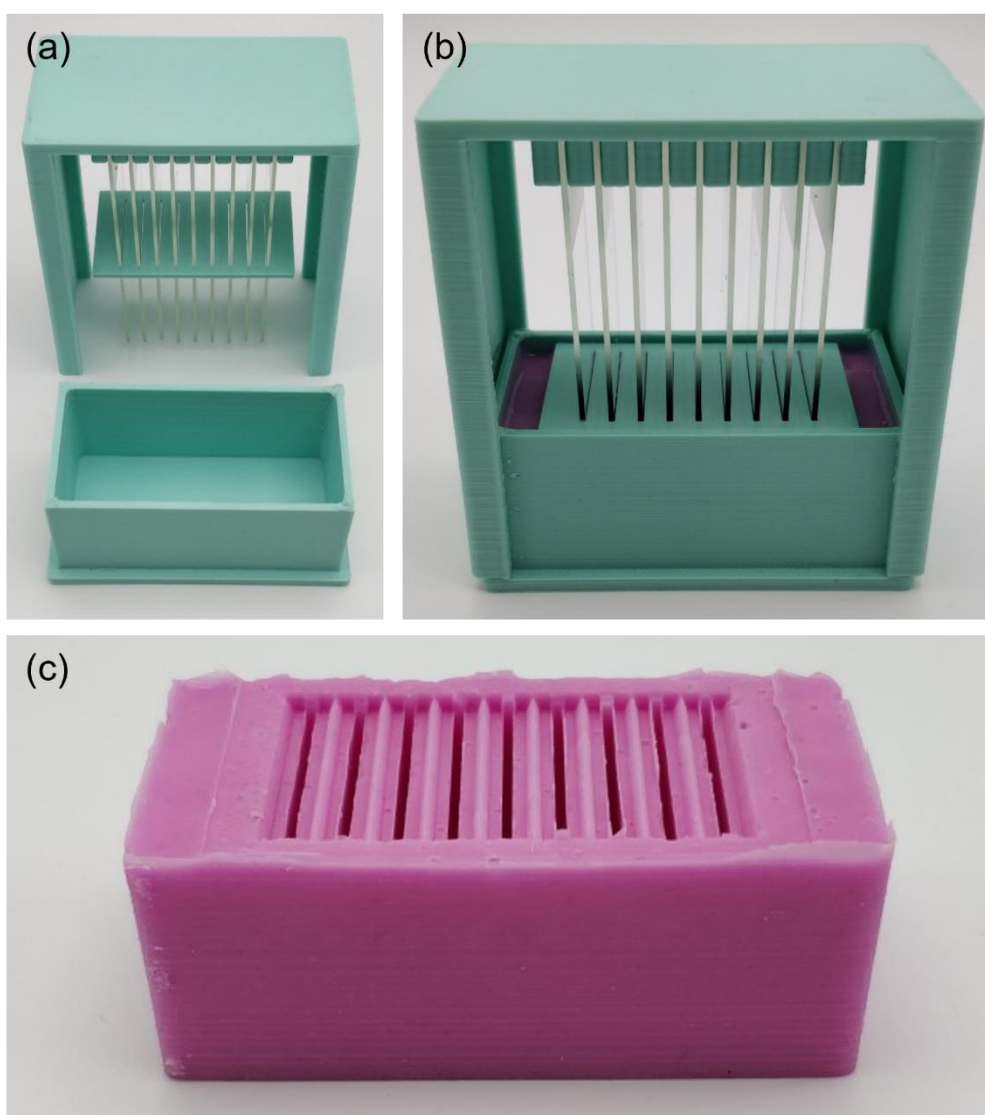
Images of mould synthesis. (a) 3D printed mould negative with glass slides. (b) Silicone mould in negative. (c) Final silicone mould.
